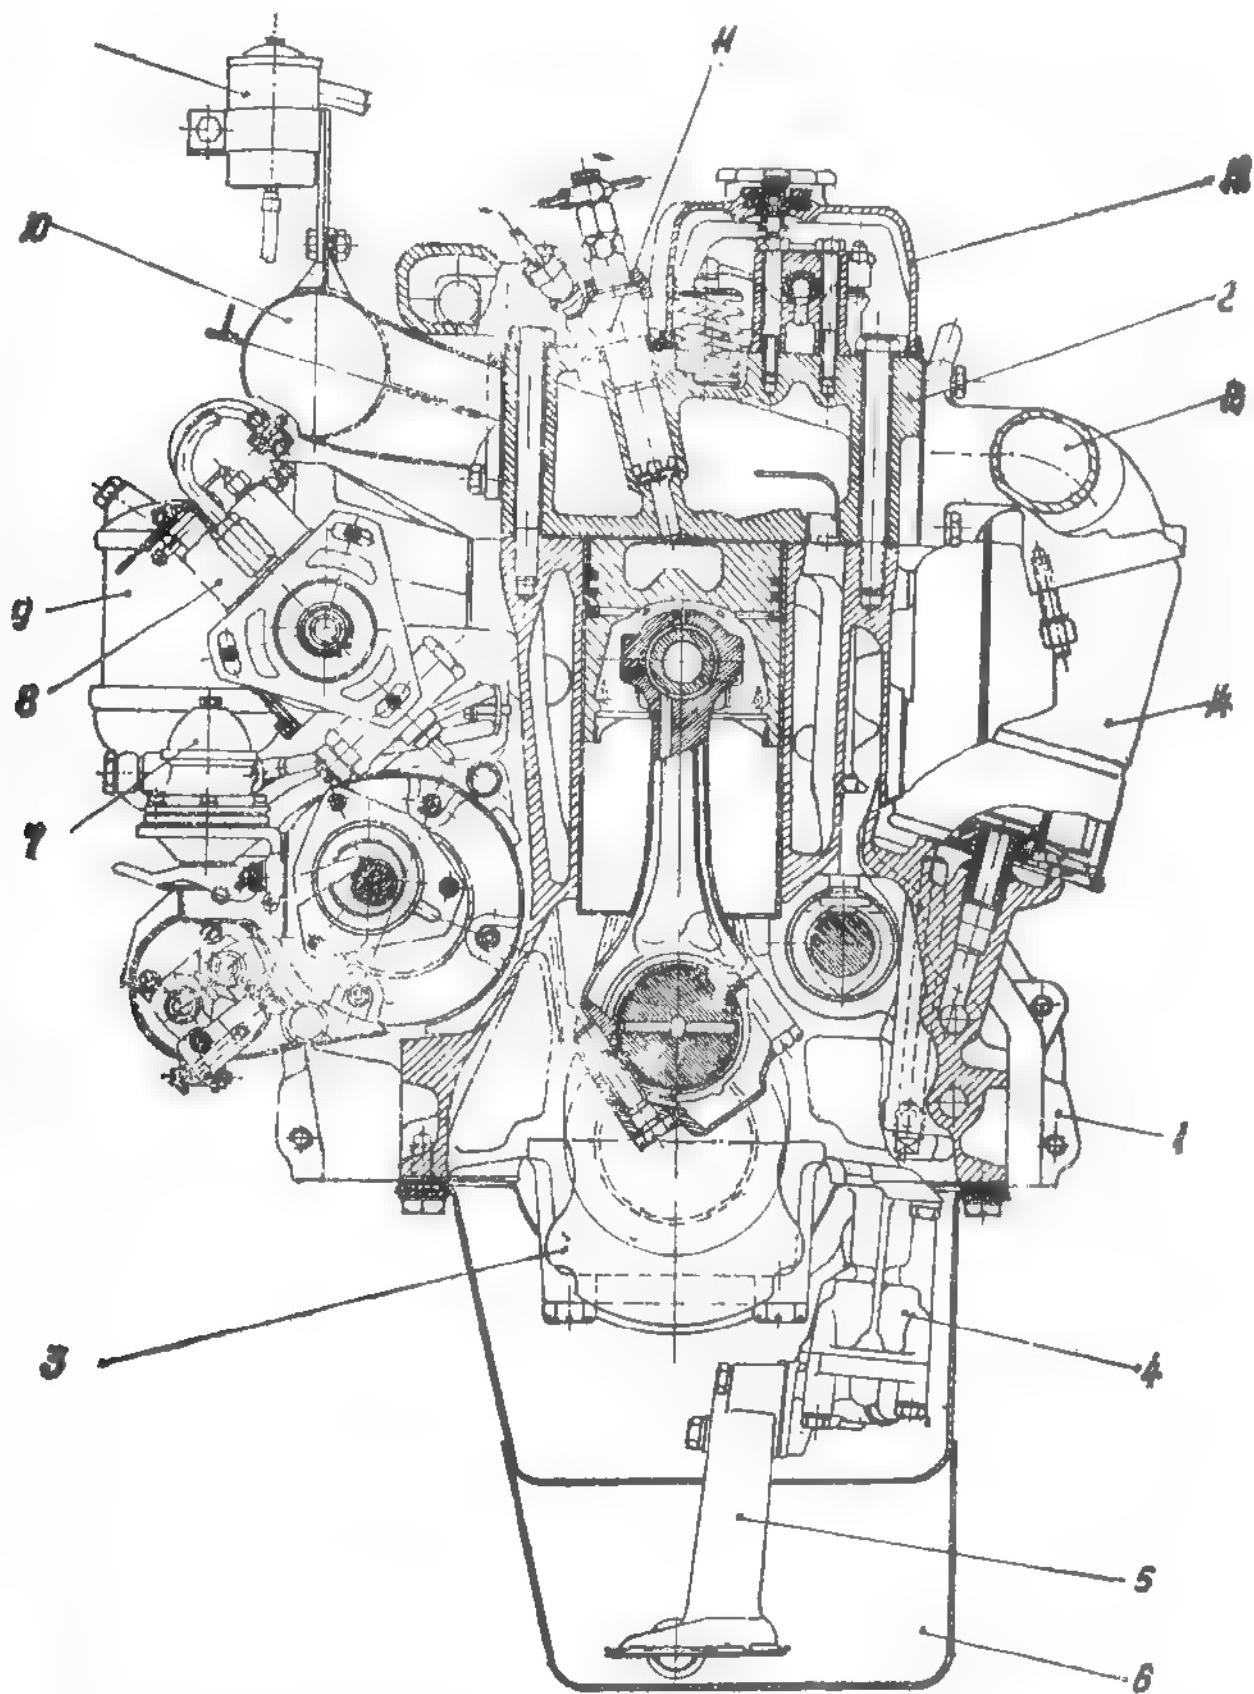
CROSS SECTION OF ARO D-127 DIESEL ENGINE
